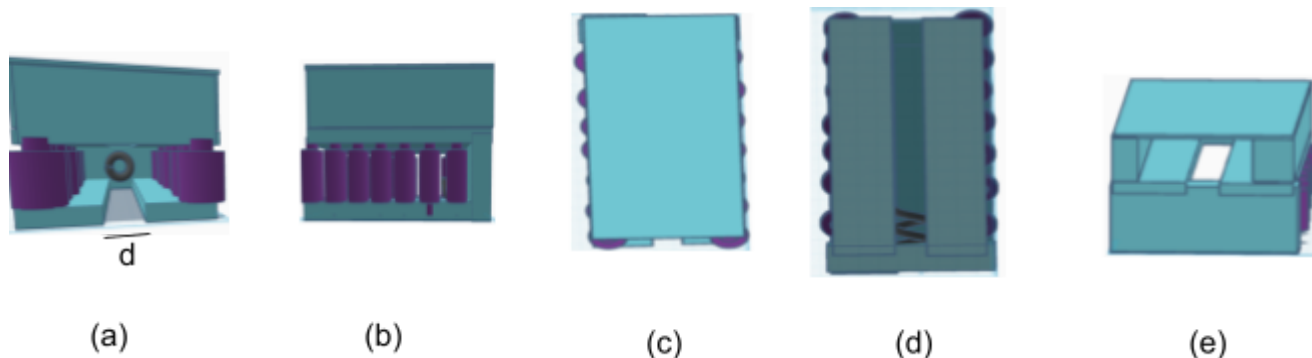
, (a) - Front side view, (b) - Right/Left side view, (c) - Back side view, (d) - Bottom side view, (e) - Top side view
